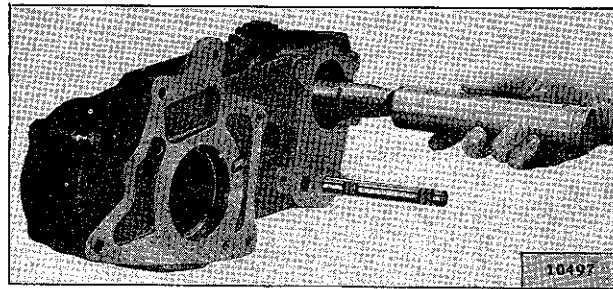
OUTPUT SHAFT SNAP RING INSTALLER
